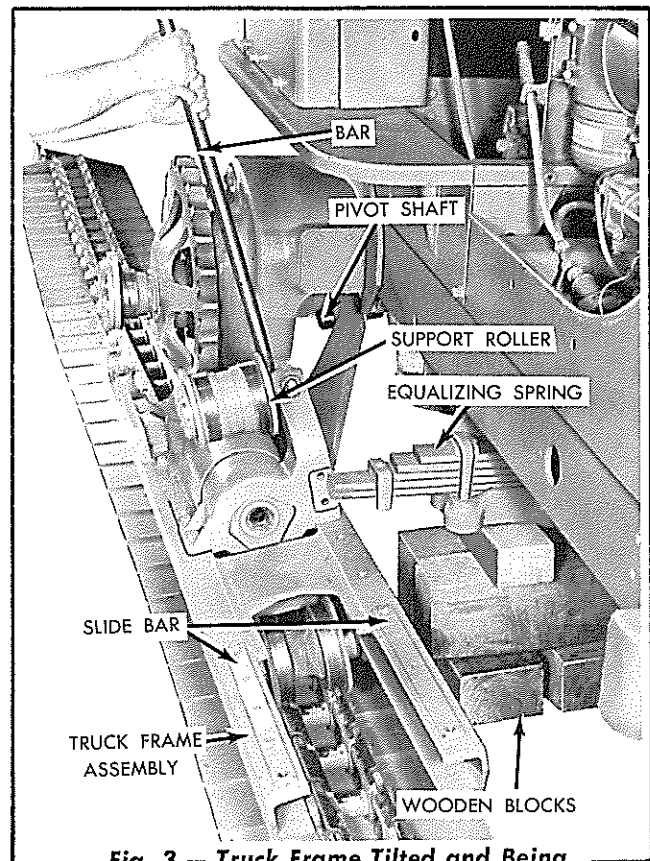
Truck Frame Tilted and Being Rolled Forward
